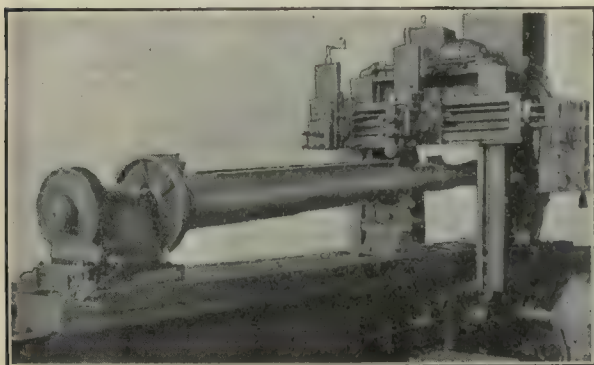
PLANING A CONICAL SECTION ON LOCKING HOOP
